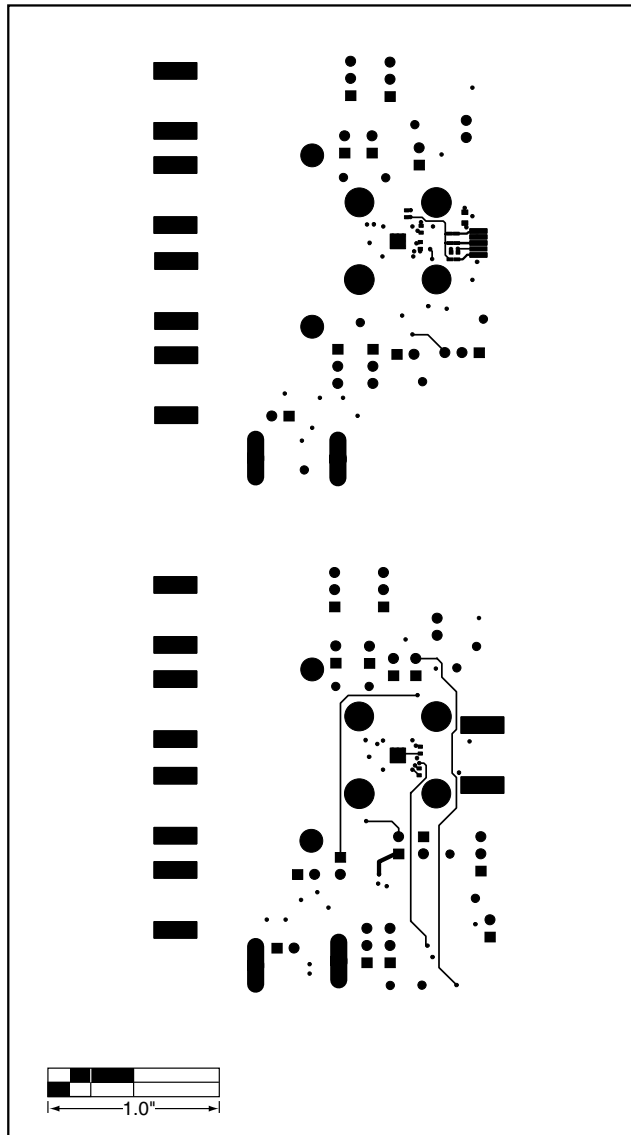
MAX3273 EV Kit PC Board Layout—Solder Side
